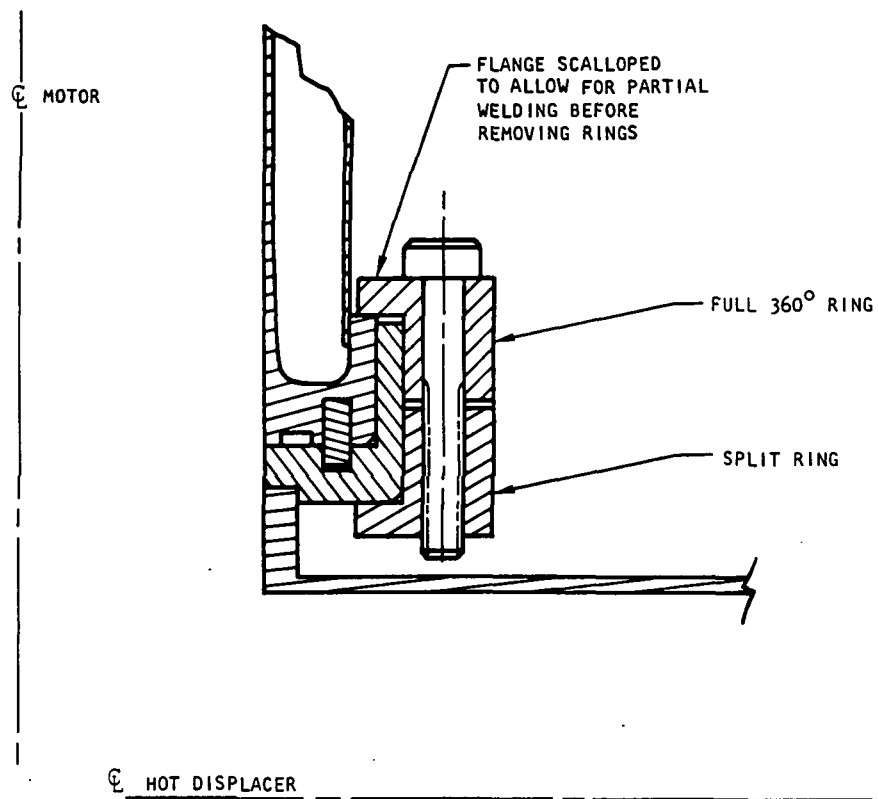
Removable Split Ring Fixture Motor Housing .
